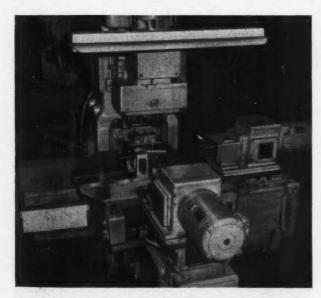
One of the most up-to-date machines in the factory is this 4-way drill built by the Mitsubishi Shipbuilding & Engineering Co., Ltd., which is employed for drilling numbers of holes up to 20, in castings of different designs. The machine incorporates standardized unit heads and other components
